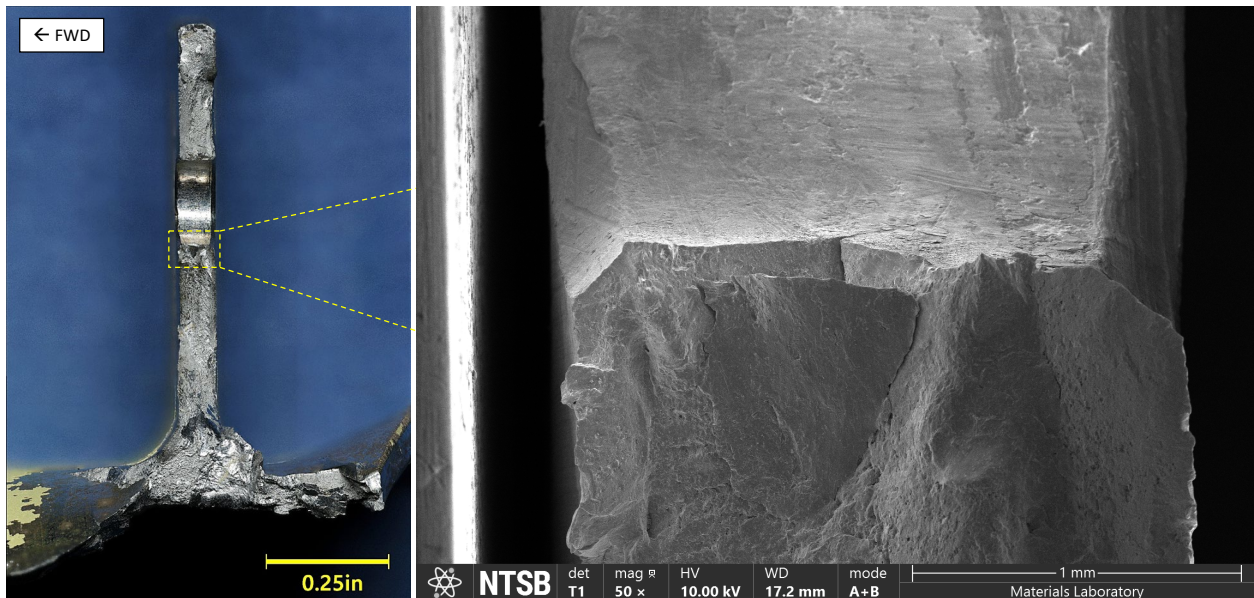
Secondary electron fractograph (right) of the lower main spar cap fracture surface (inboard fracture location) below the fastener hole showing mechanical contact damage.
